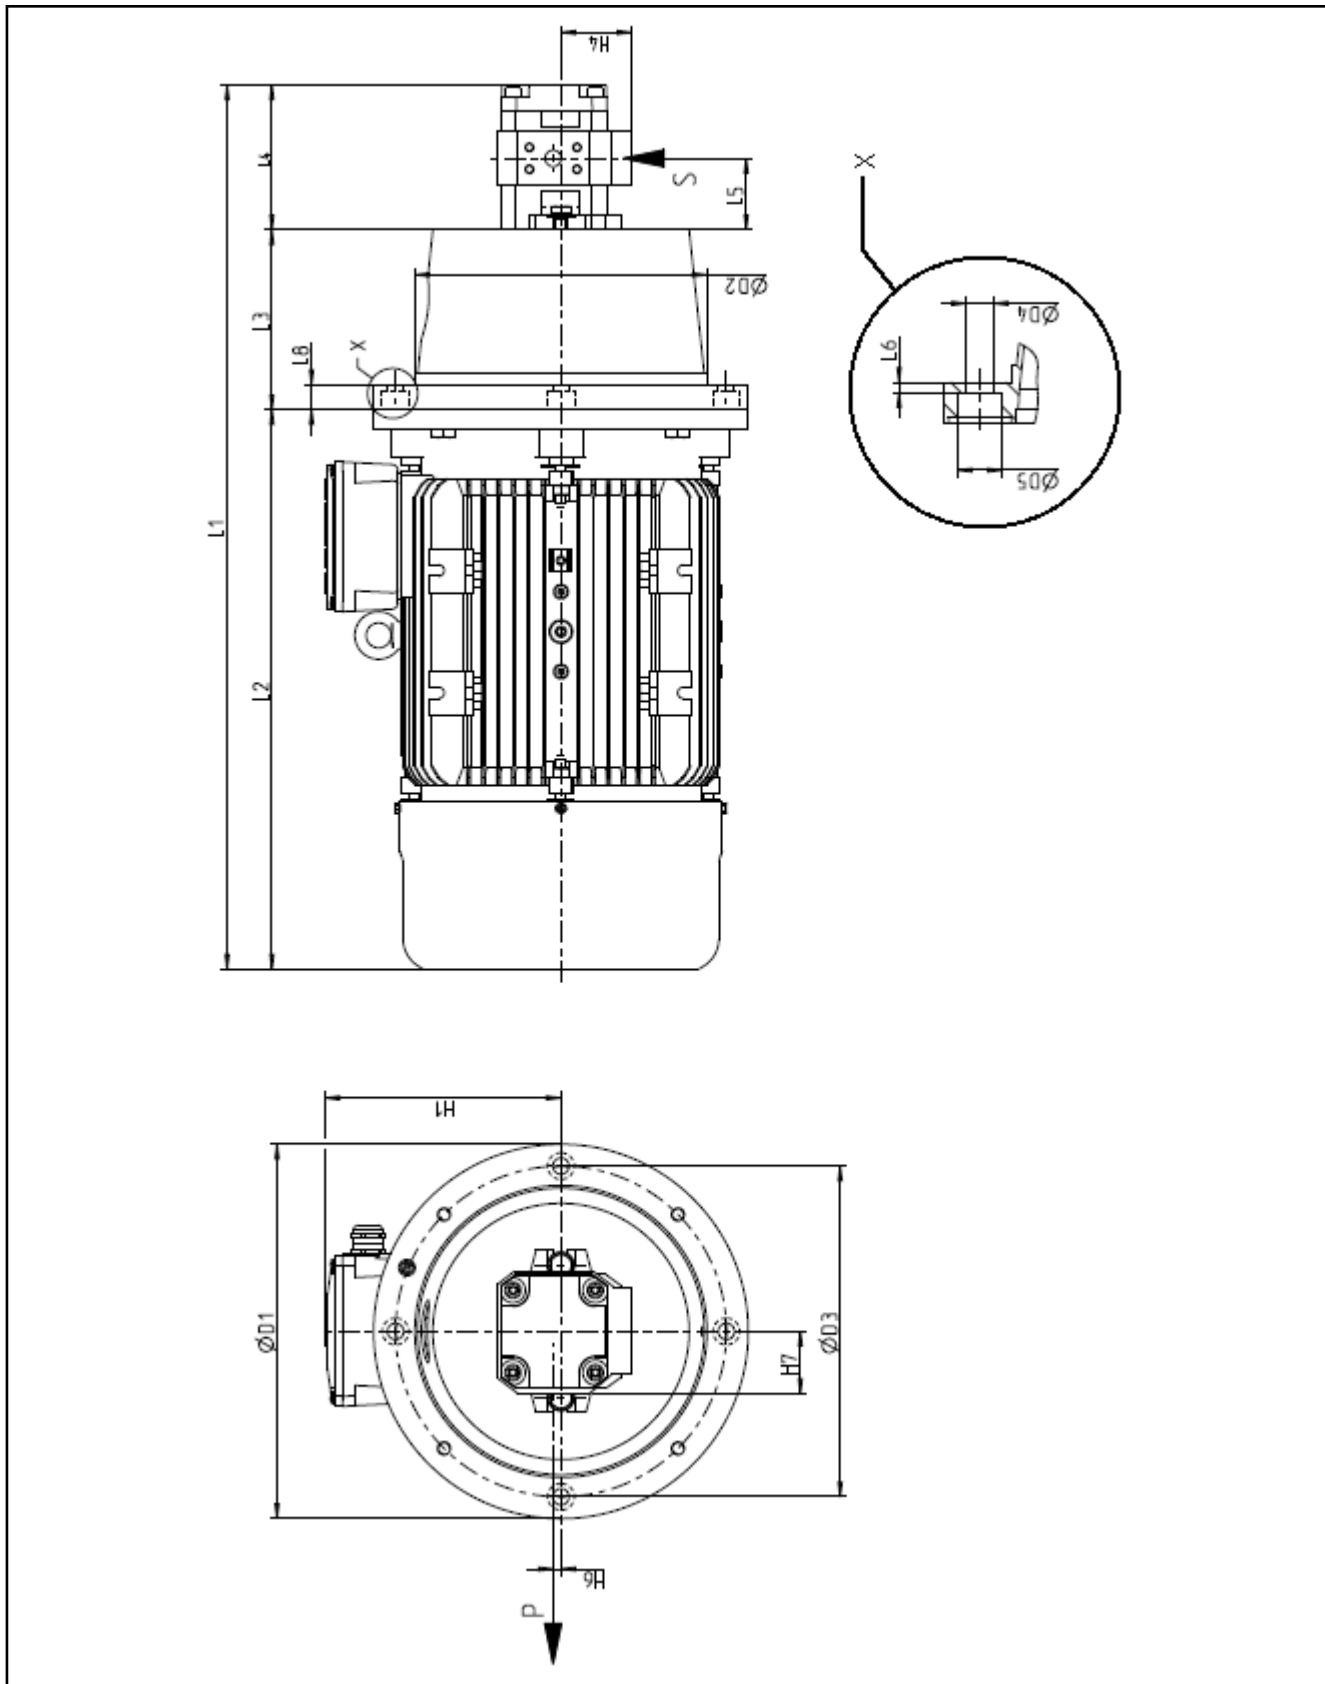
Dimension sheet "MPES2" with "PGH2" in the fastening mode "V" (vertical flange fastening, without foot)
